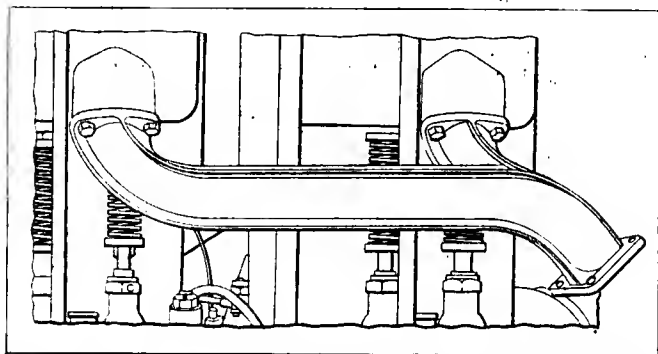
Depleting a manifold in which the holding bolts are get-at-able, and of good practical size
